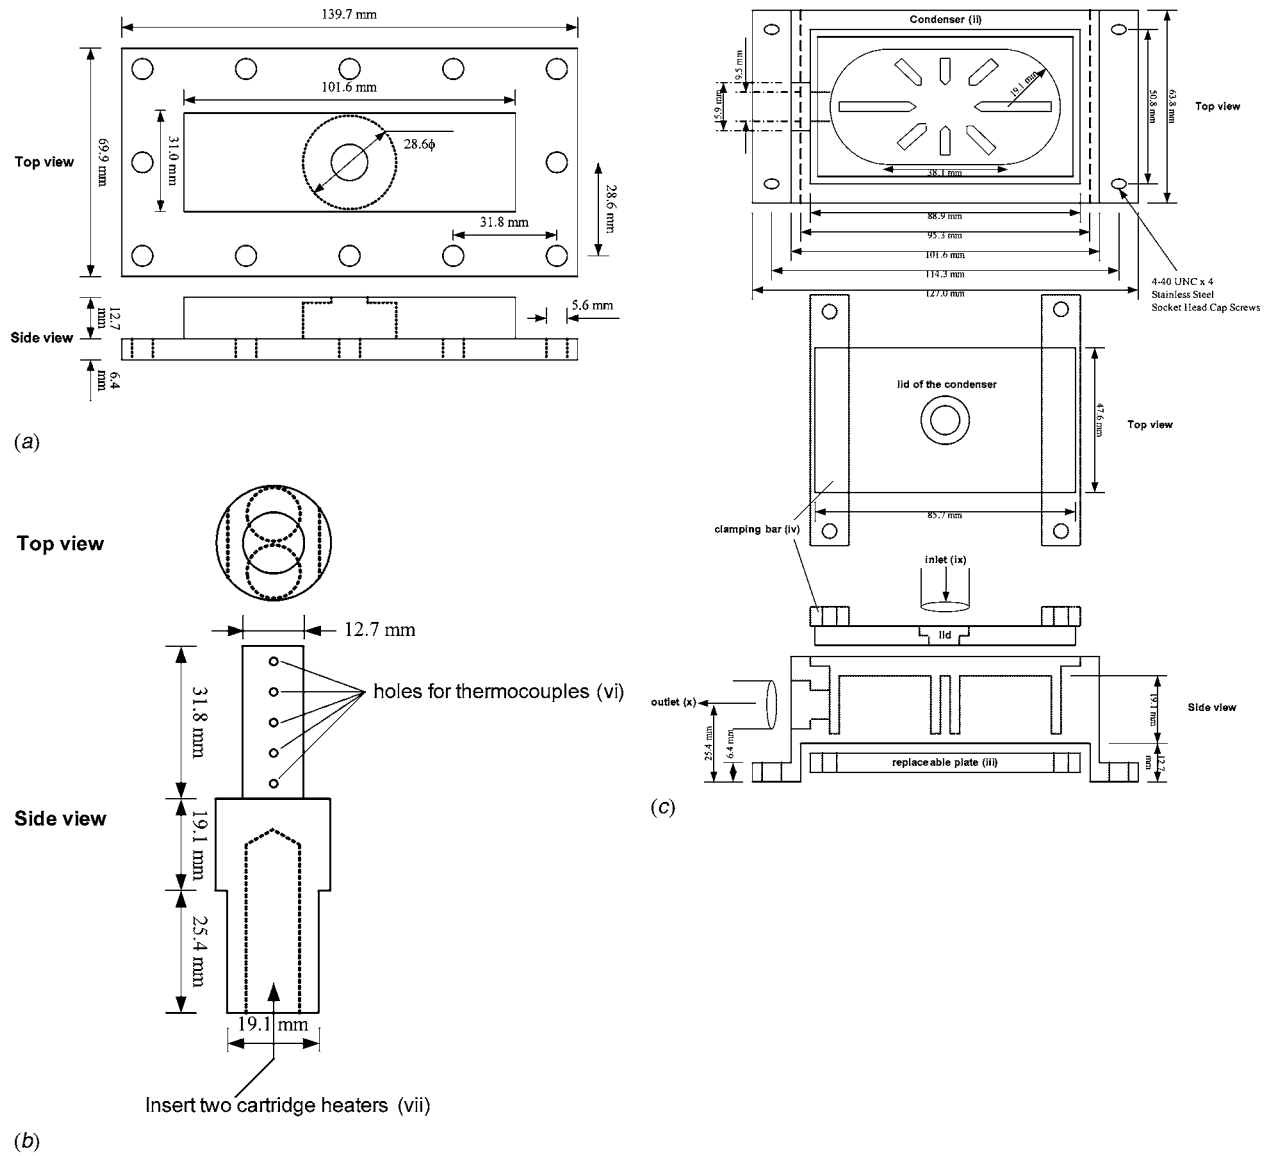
Dimension of (a) holding flange (v), (b) heater element (i), (c) condenser (ii)
